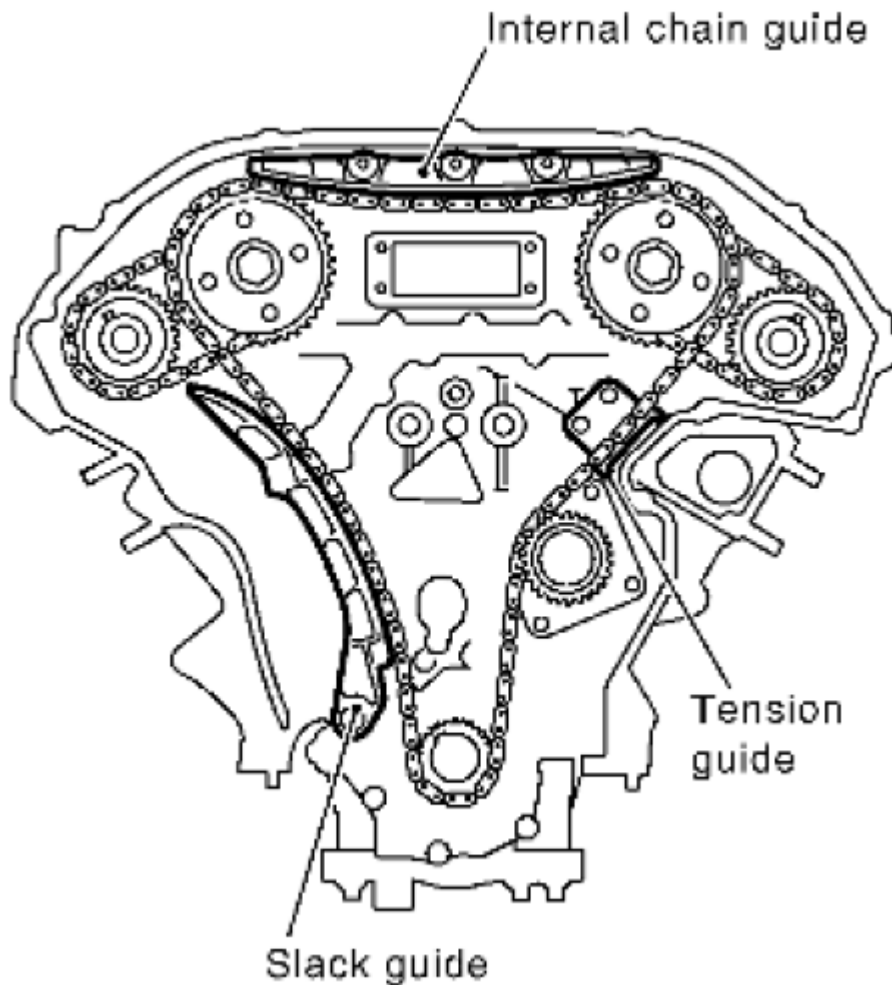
Removing Internal Chain Guide, Tension Guide And Slack Guide
